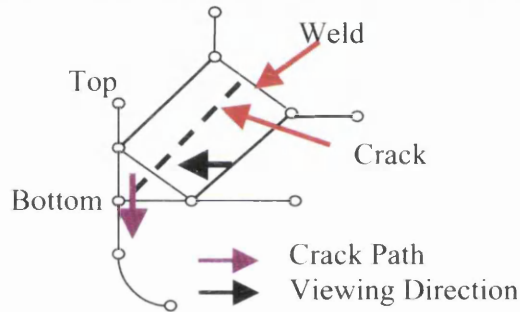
Viewing Angles for the Fracture Surface Examination
